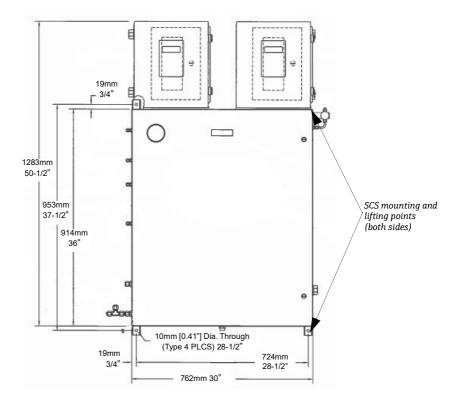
Lifting points and mounting dimensions for the 2-Pack and 3-Pack TDLAS Gas analyzer
